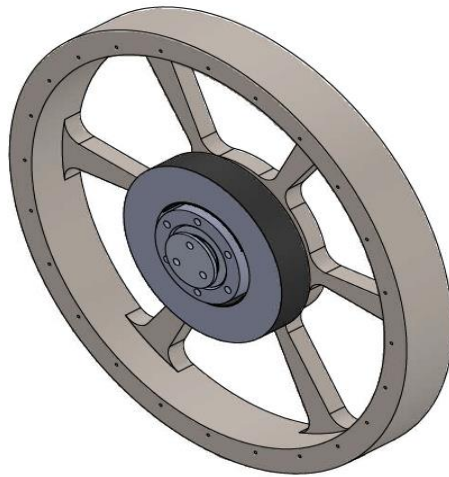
Representation of Wheel Mounted on Outer Rotor of BLDC Motor
